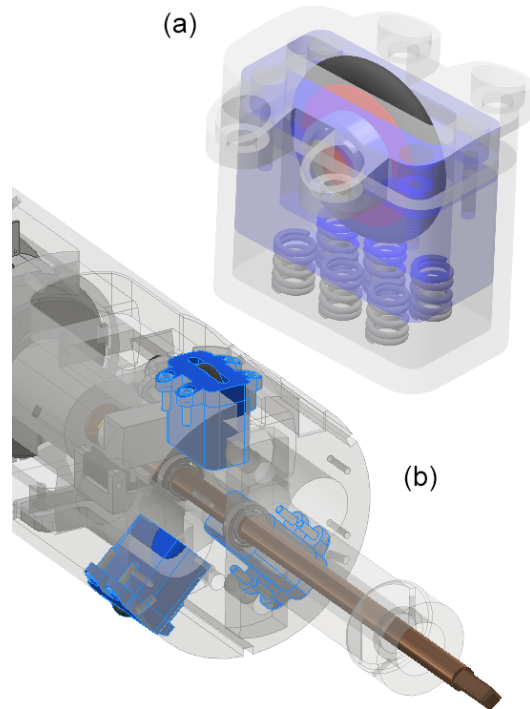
Rendering of the stabilizing wheel (a) and a detail of its mounting in the base of the probe (b). The wheel assemblies are highlighted in blue.
